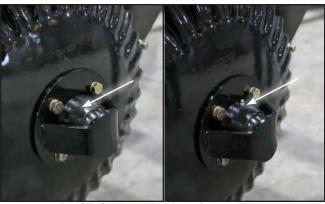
Coulter Hubs: Plug/Grease Fitting
